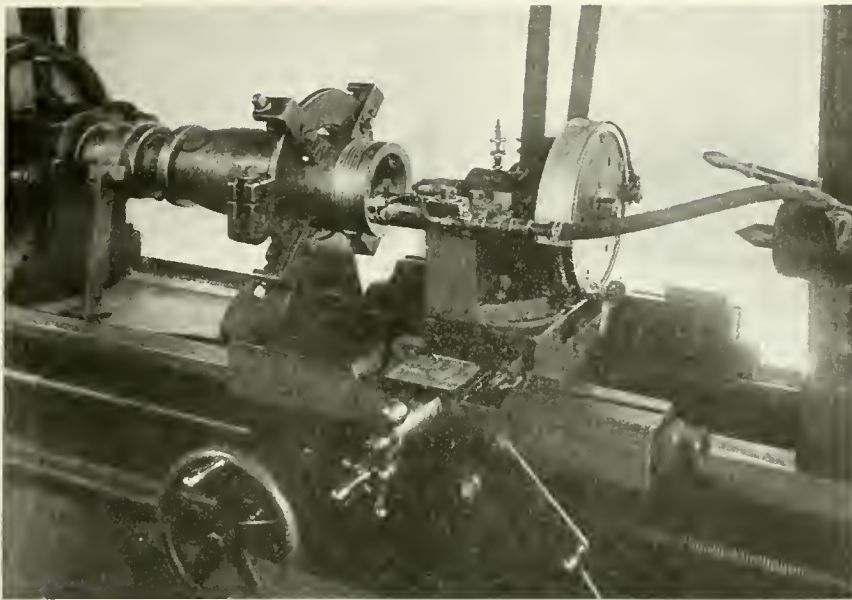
FRONT VIEW OF BASE THREAD MILLING ATTACHMENT ON C.M.C. LATHE.
